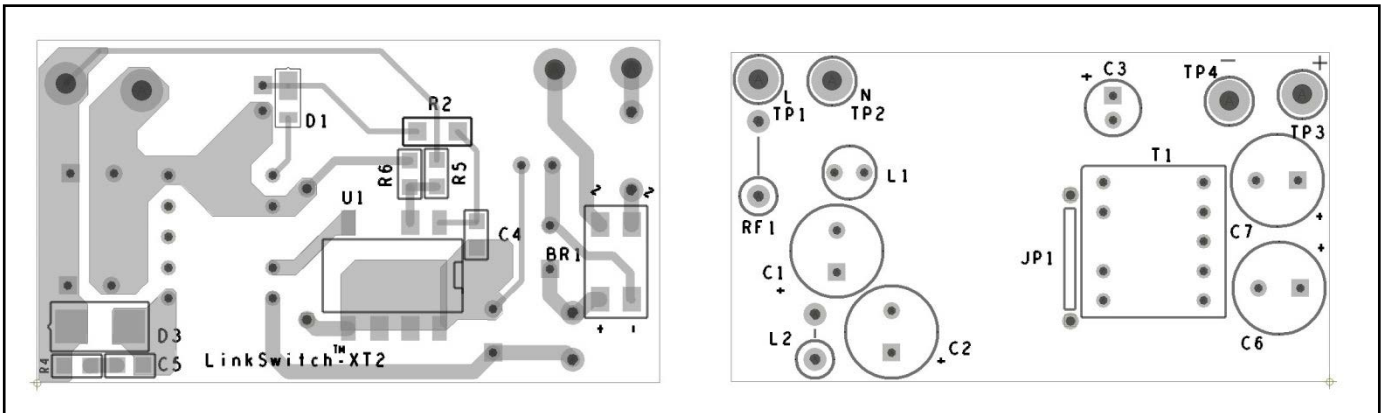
Recommended Printed Circuit Layout for LinkSwitch-XT2 using G Package in a Flyback Converter Configuration (Bottom Left, Top Right).
